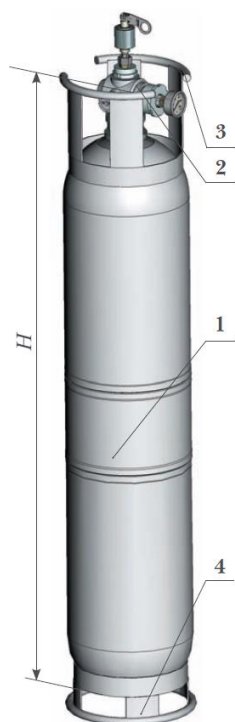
Overall view of a module with a shut-off valve and solenoid valve
